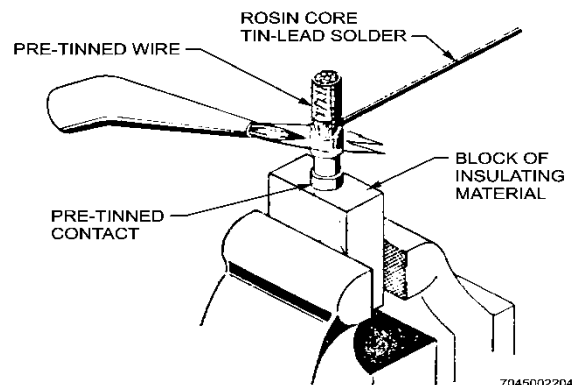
Torch Soldering Thermocouple Wire to MS Connector Contact
